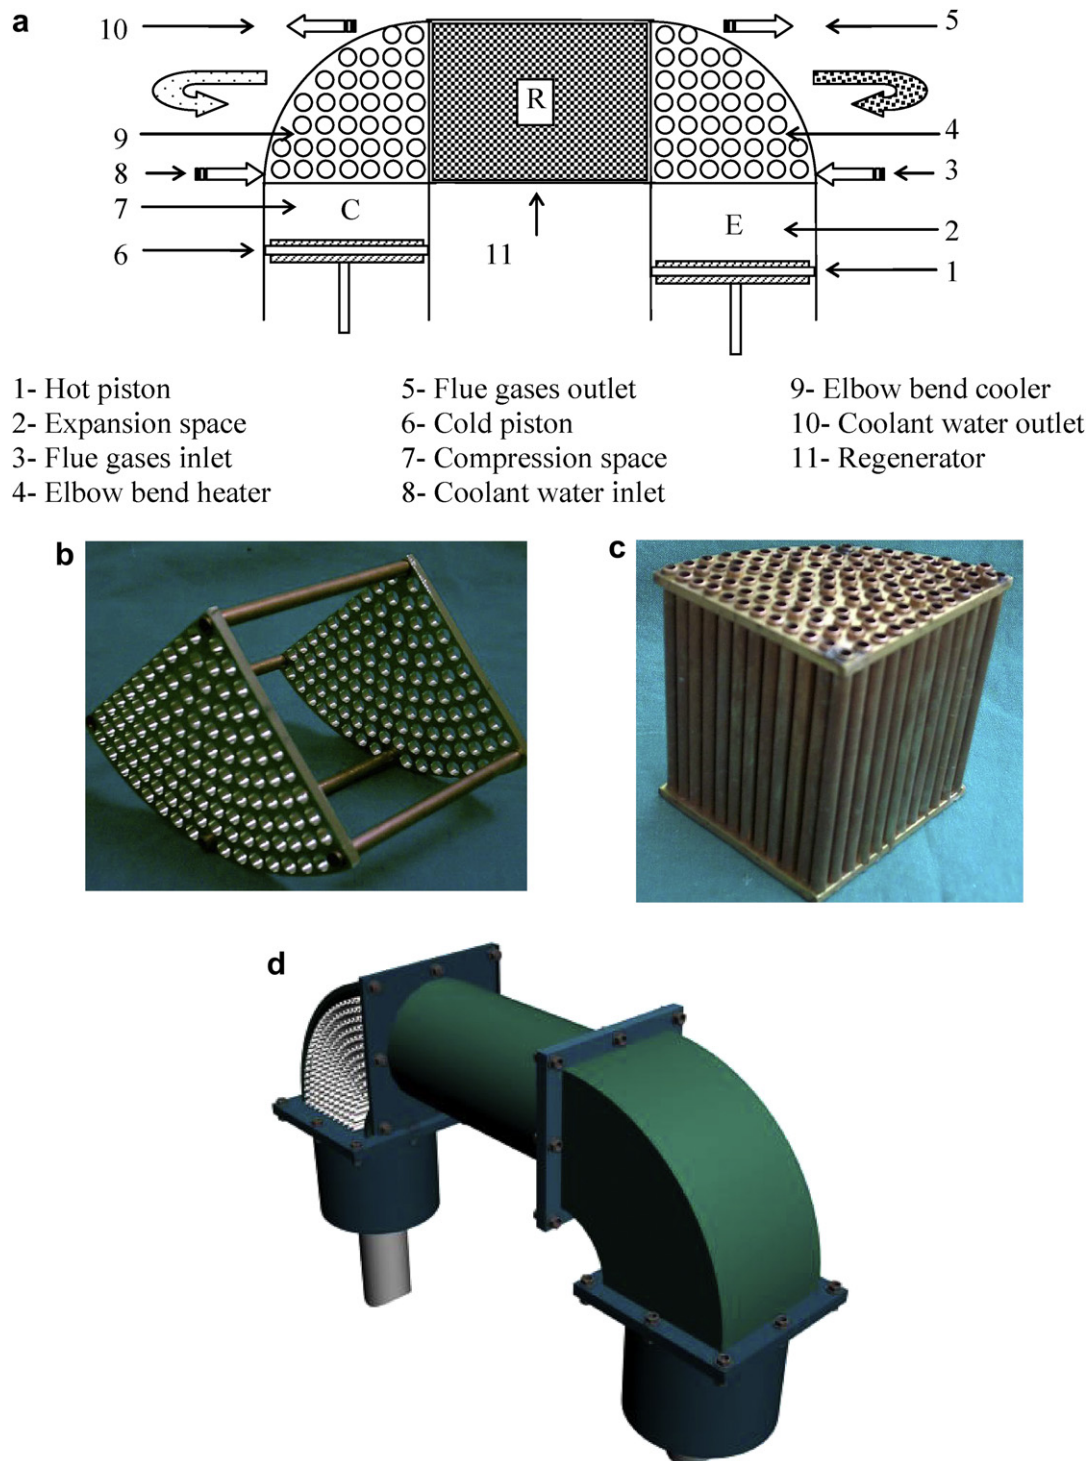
a. Schematic diagram of the main parts of an alpha-type Stirling engine. b. Elbow-bend heat exchanger assembly. c. Elbow-bend heat exchanger. d. Isometric of the main parts of an alpha-type Stirling engine with elbow-bend heat exchangers.
